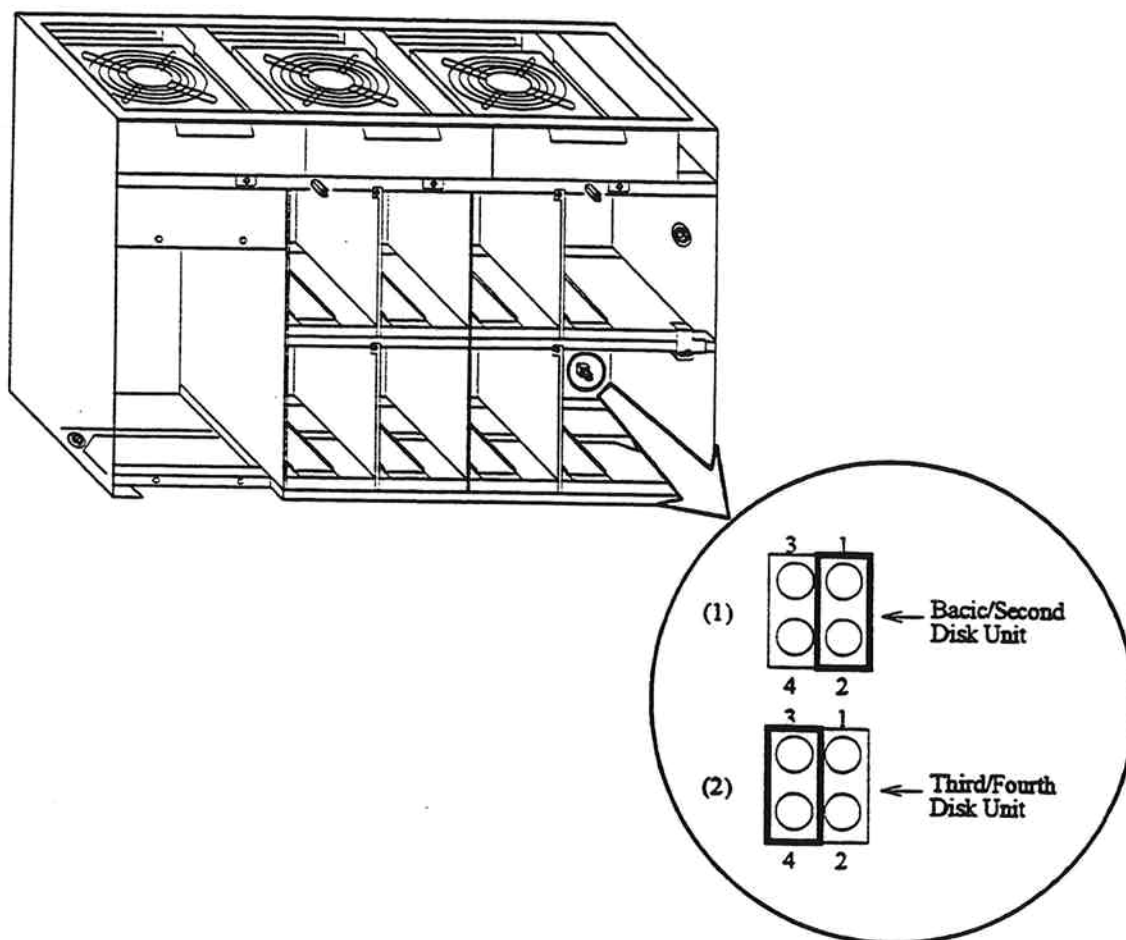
Address Setting of the HDU Box
